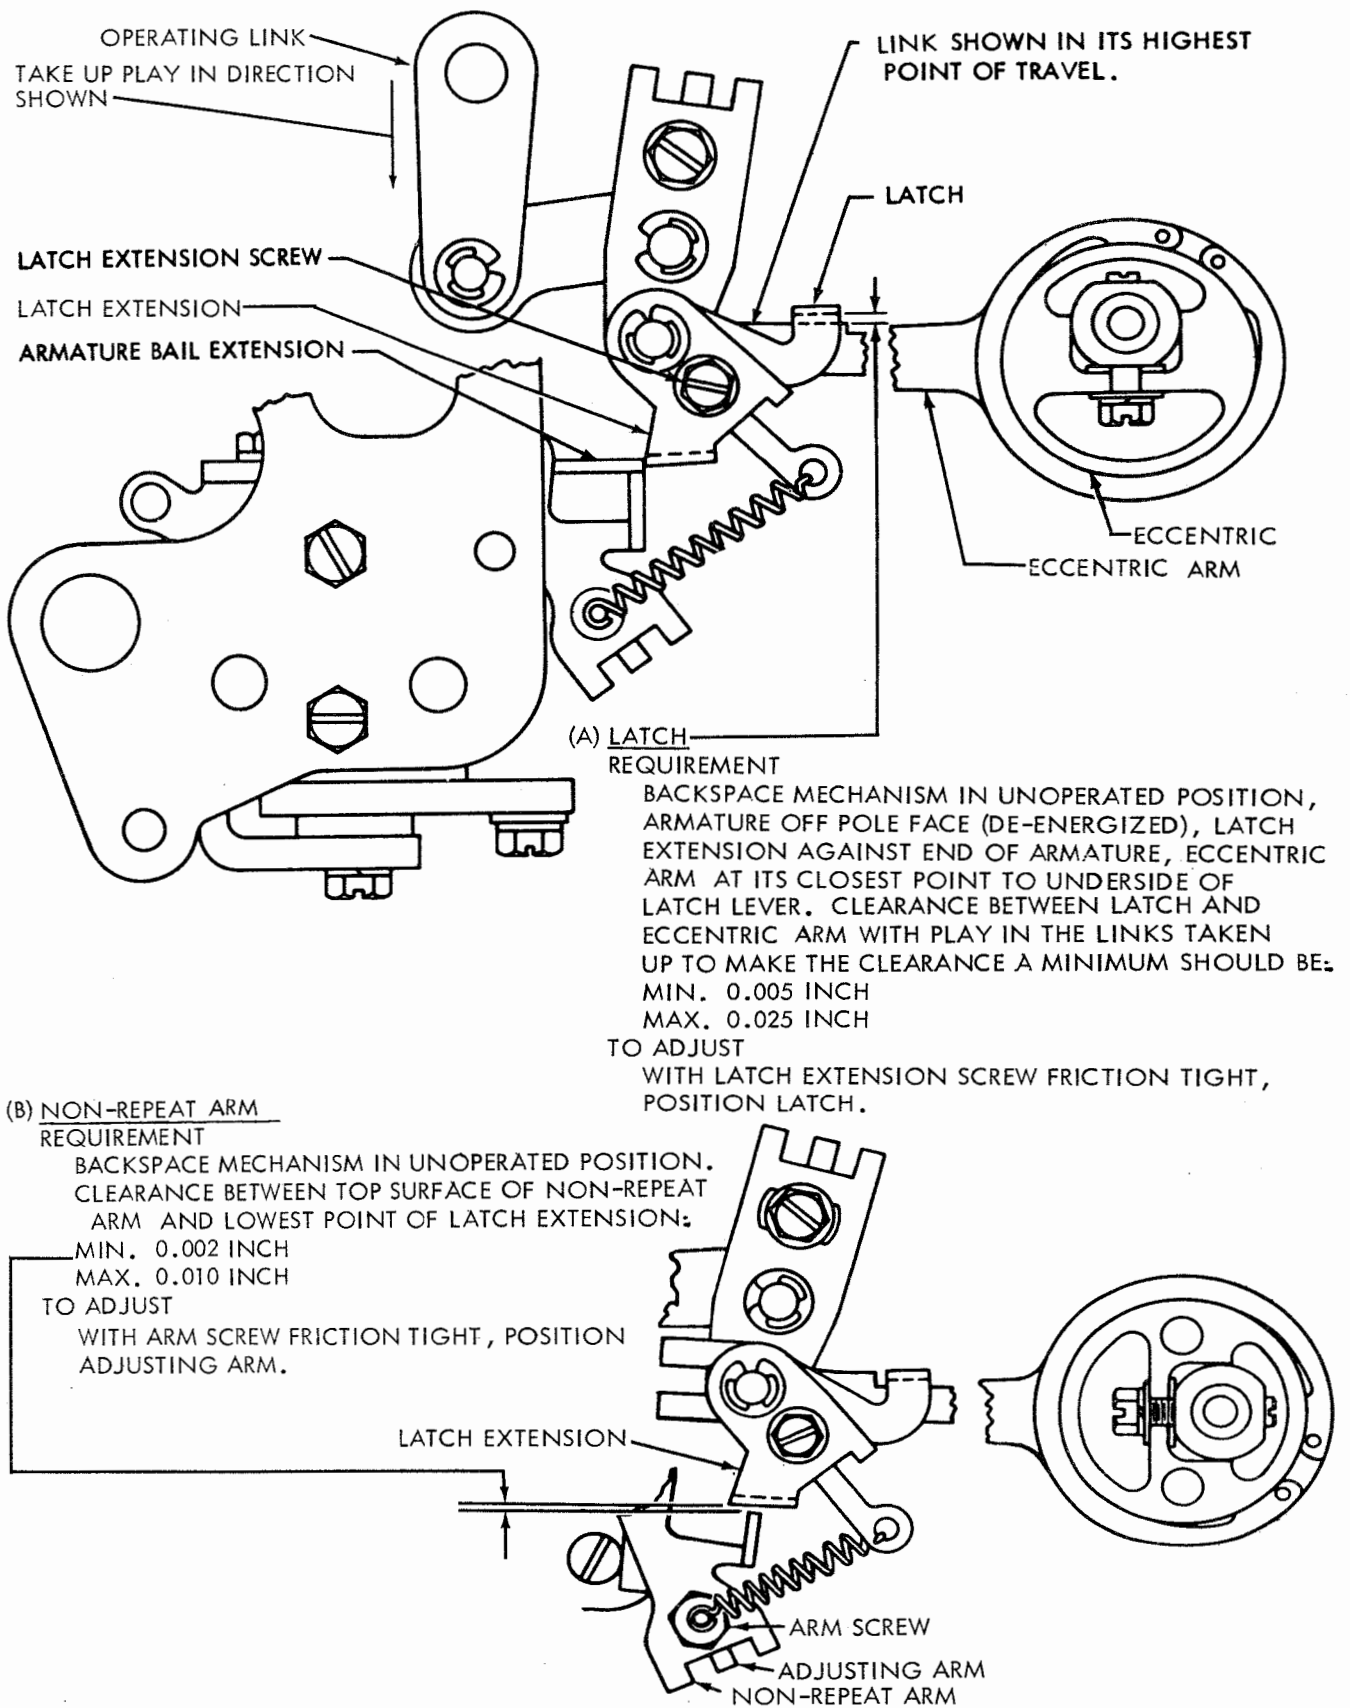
J. TYPING REPERFORATOR TT-373/UG, TT-375/UG, POWER DRIVE BACKSPACE MECHANISM FOR FULLY PERFORATED TAPE
